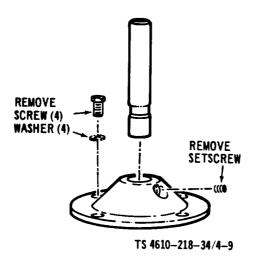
Erdlator Agitator Shaft Bearing Support, Removal and Installation
